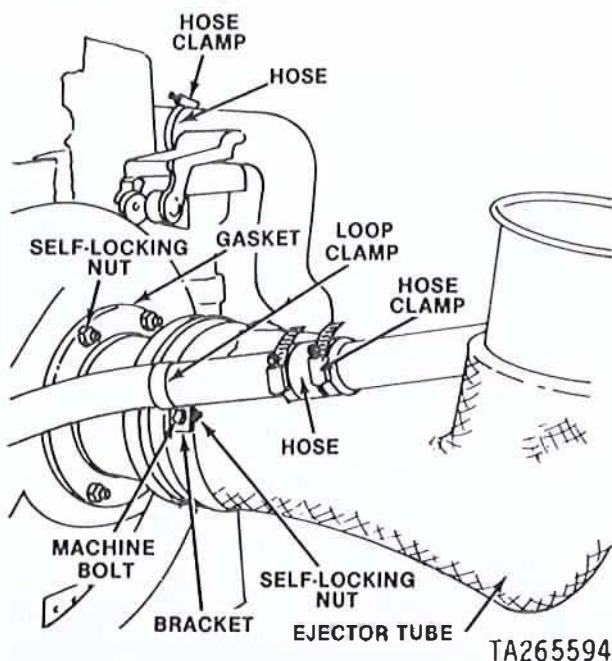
Removing or Installing Dust Ejector Exhaust Pipe
